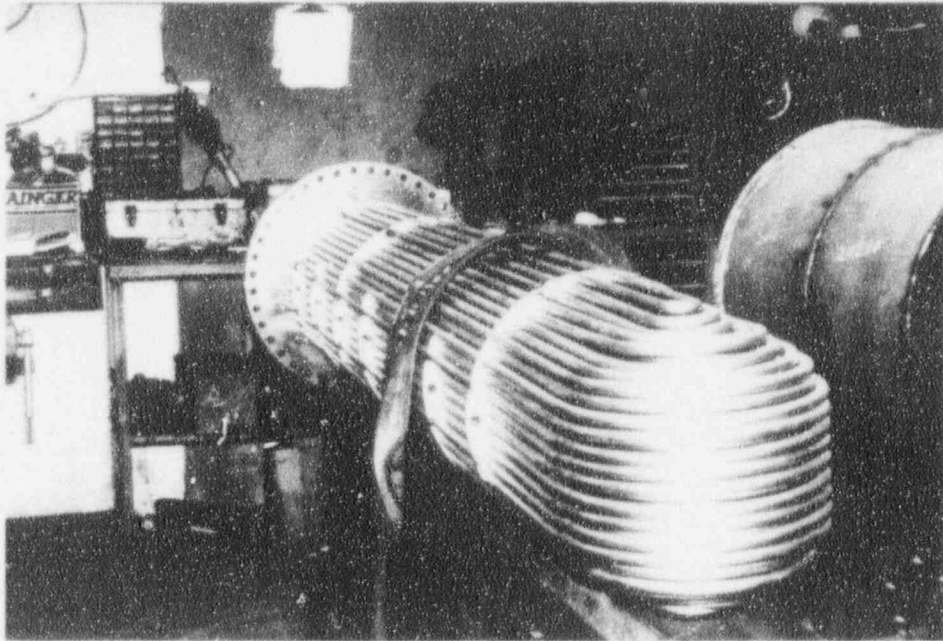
Steam Generator Tube Bundle During Shop Assembly
